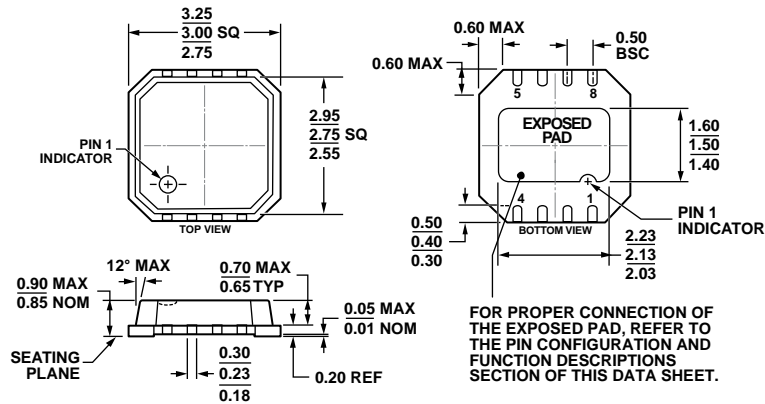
8-Lead Lead Frame Chip Scale Package [LFCSP_VD]
